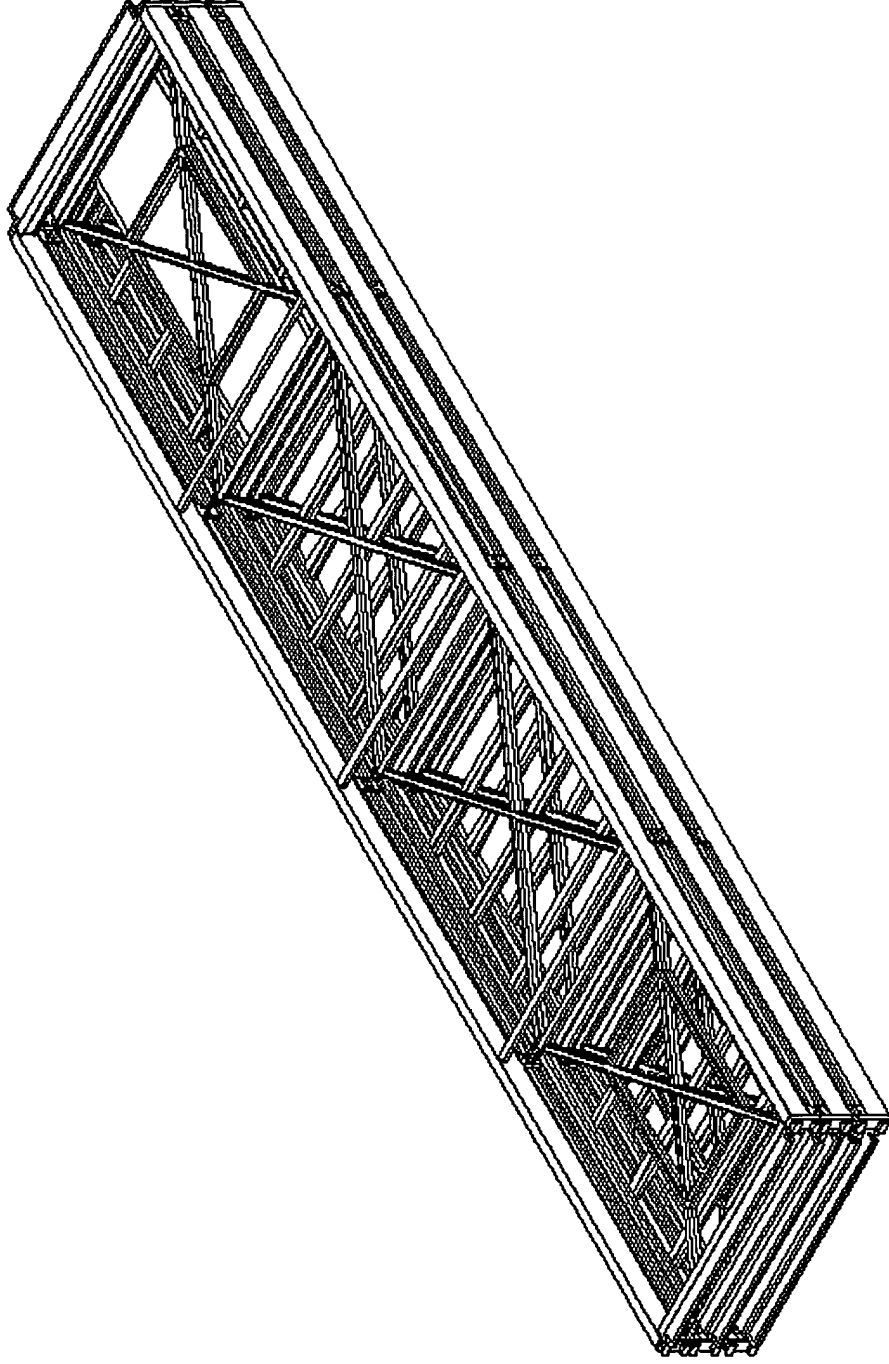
A: Step2 of disassemble and load process: The first “collapsible cargo container frame panel assembly” is stacked on top of previous assembly.
